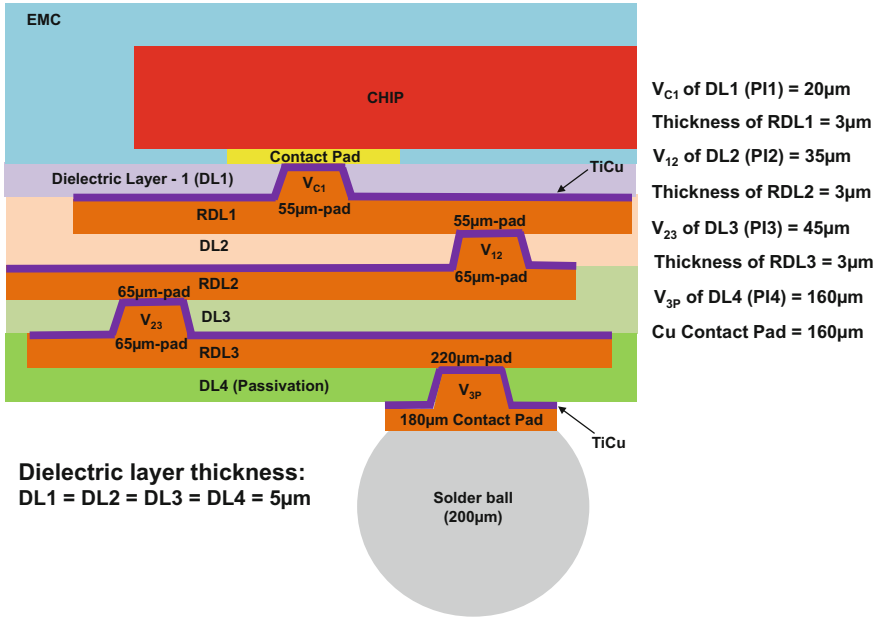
Schematic of the cross section of the test package with conventional solder ball attachment
